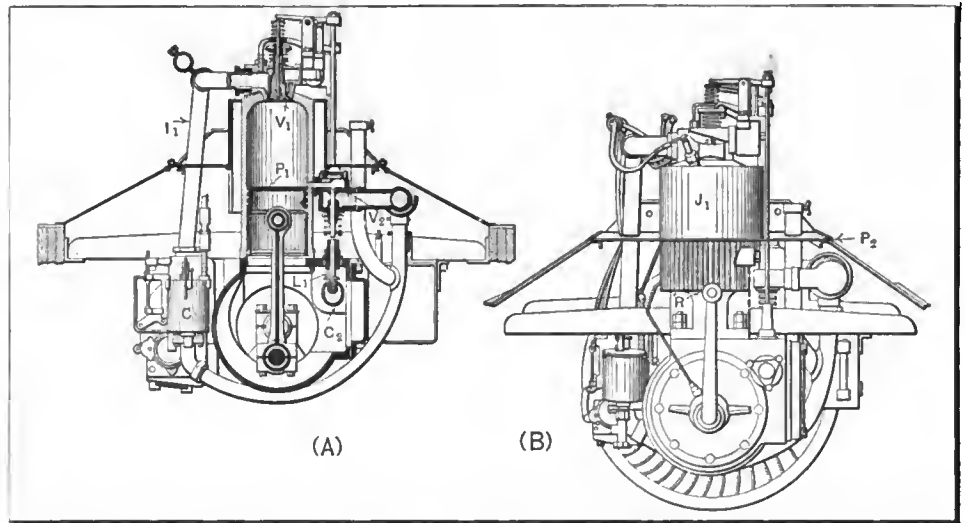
Sections of the motor; (A) Through a cylinder, presenting details, and (B) Exterior of a cylinder showing method of cooling
